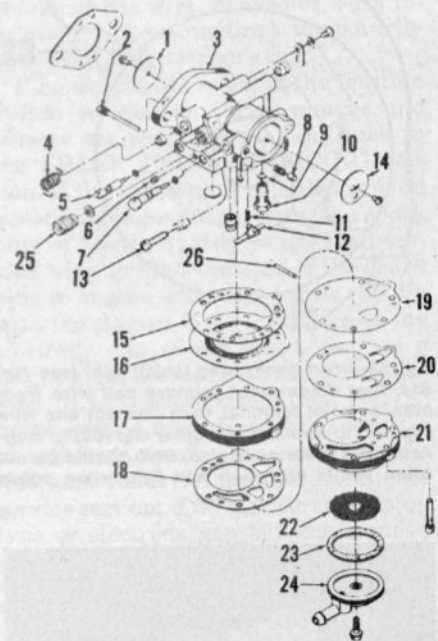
Exploded view of Tillotson Model HL carburetor. On some HL carburetors, pump diaphragm (19) and valves (20) are one-piece. Governor valve (25) is not used on all carburetors.
